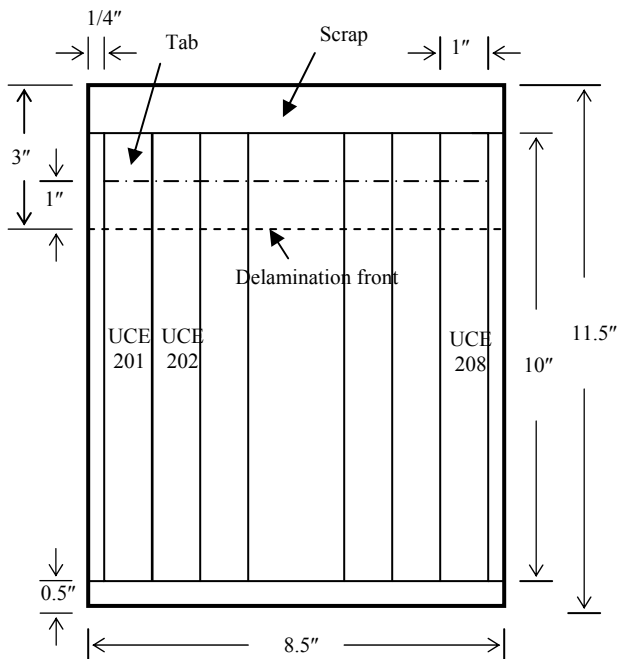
T800H/3900-2 Panel and Specimen Layout
